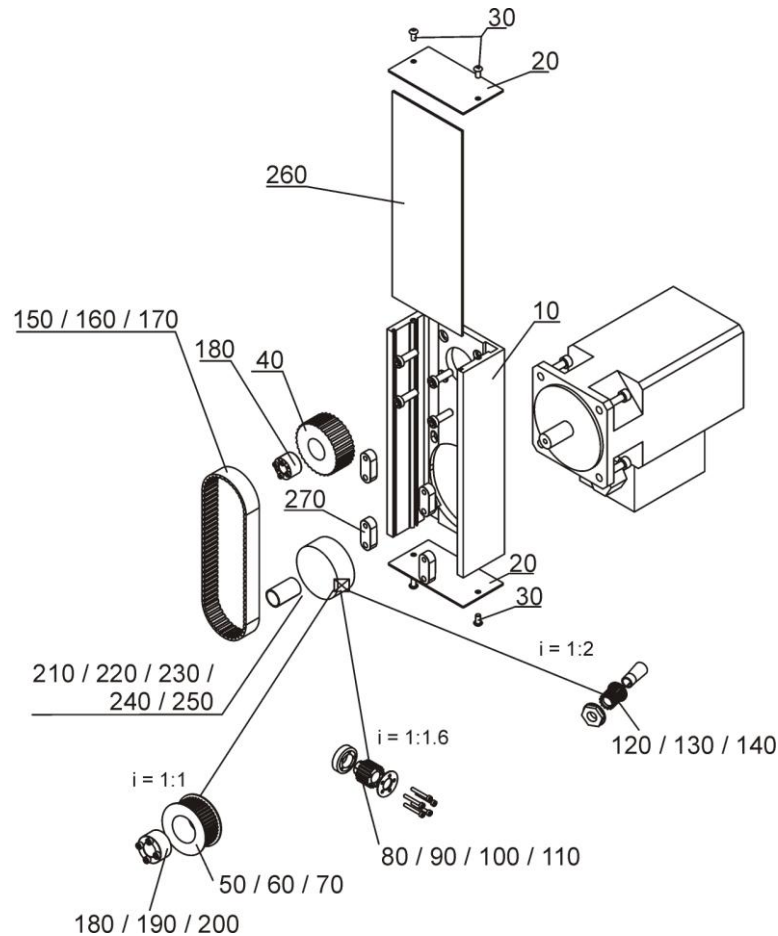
Belt gear of profiLINE 115, exploded view (TG1000645)
